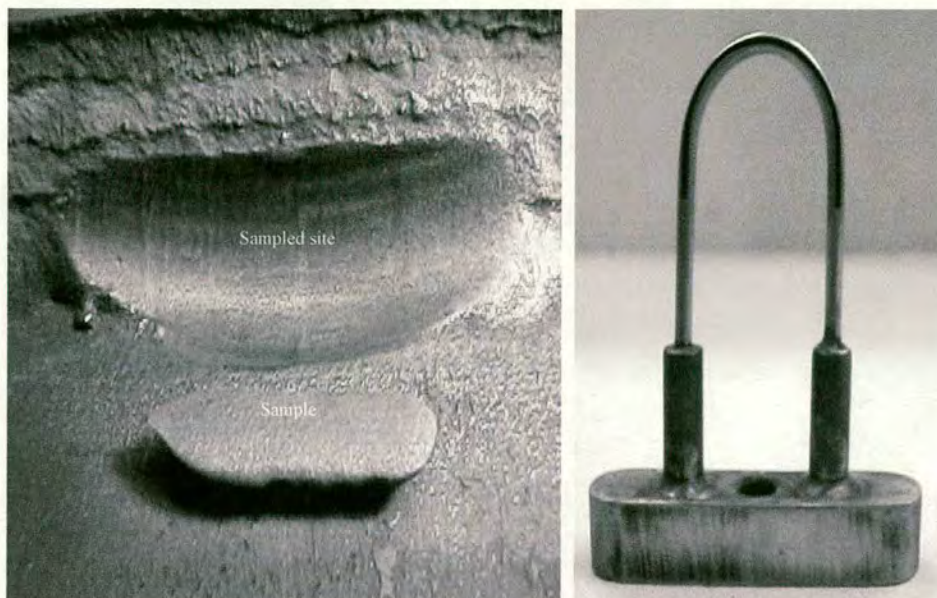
Sampled site in welded section and removed sample (left) and “U-shaped” ECM sampling tool (right).
